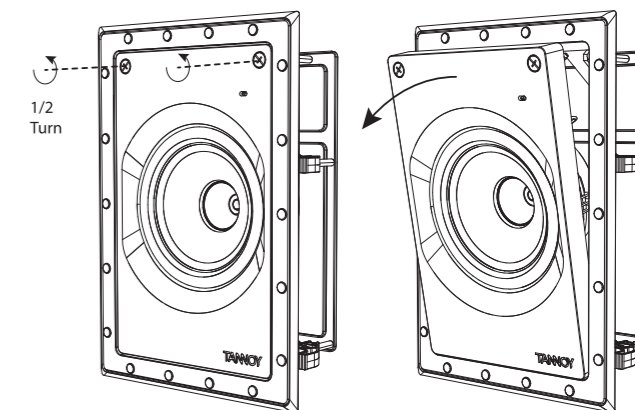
Removing the Loudspeaker Assembly from the Frame
